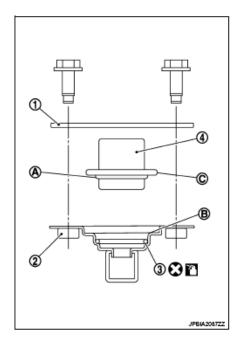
Identifying Fuel Damper And O-Ring Courtesy of NISSAN MOTOR CO., U.S.A.
